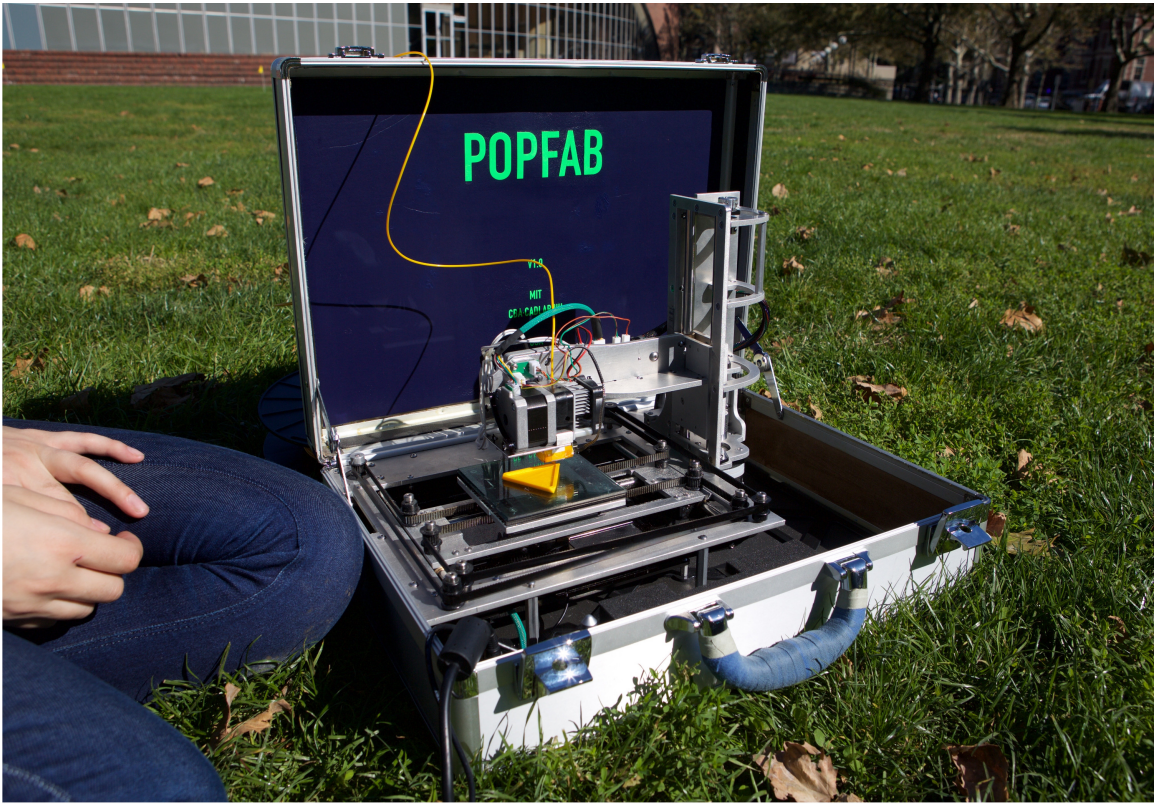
The PopFab, a portable pop-up fabrication machine here shown 3D printing and milling a circuit board. It has heads for milling, cutting, and imaging.
